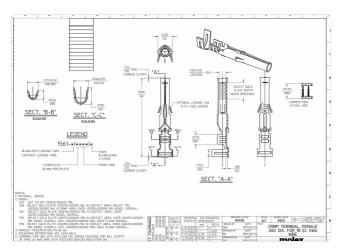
Technical Drawing of Female Crimp Terminal. This diagram provides detailed dimensions and specifications for the female Molex Series 1189 terminal, including crimp areas and overall structure.
